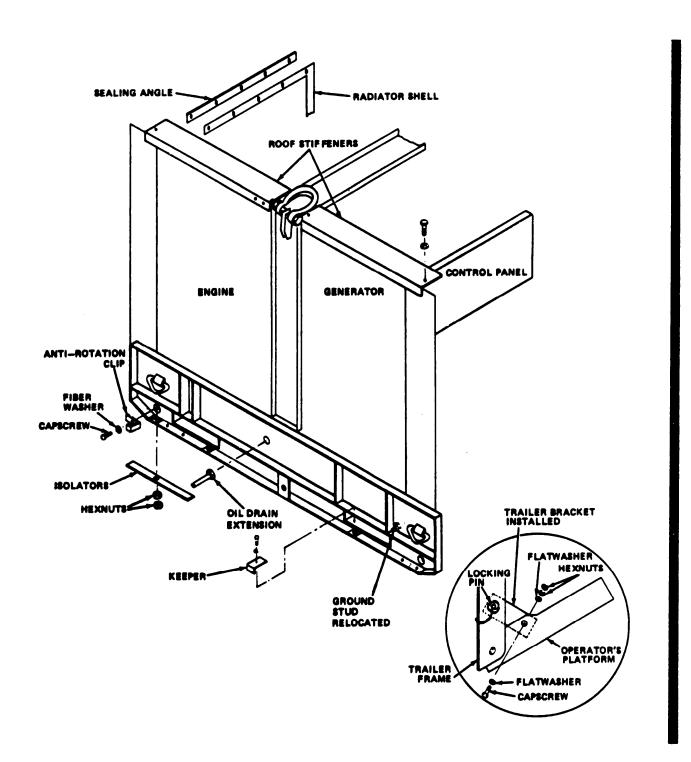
Roof Stiffeners, Sealing Angle, Oil Drain, Isolators, Bottom Panel Tray Assembly, and Trailer Brackets
